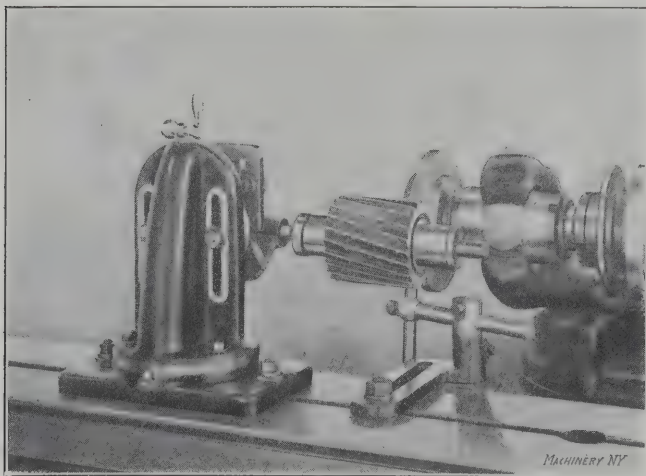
Spiral Milling Cutter being sharpened on Cutter Bar
